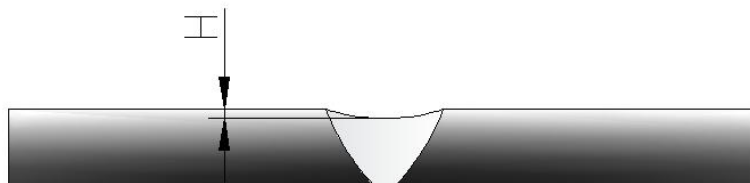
Reduction in thickness due to the welding process (face of weld concavity)
